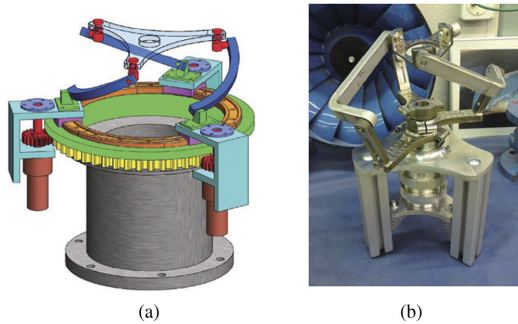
Two spherical parallel manipulators with co-axial input shafts, (a) a design with virtual co-axial shaft, namely, a circular ring with three slide units [16], (b) a design with a common shaft for three revolute joints [17].
